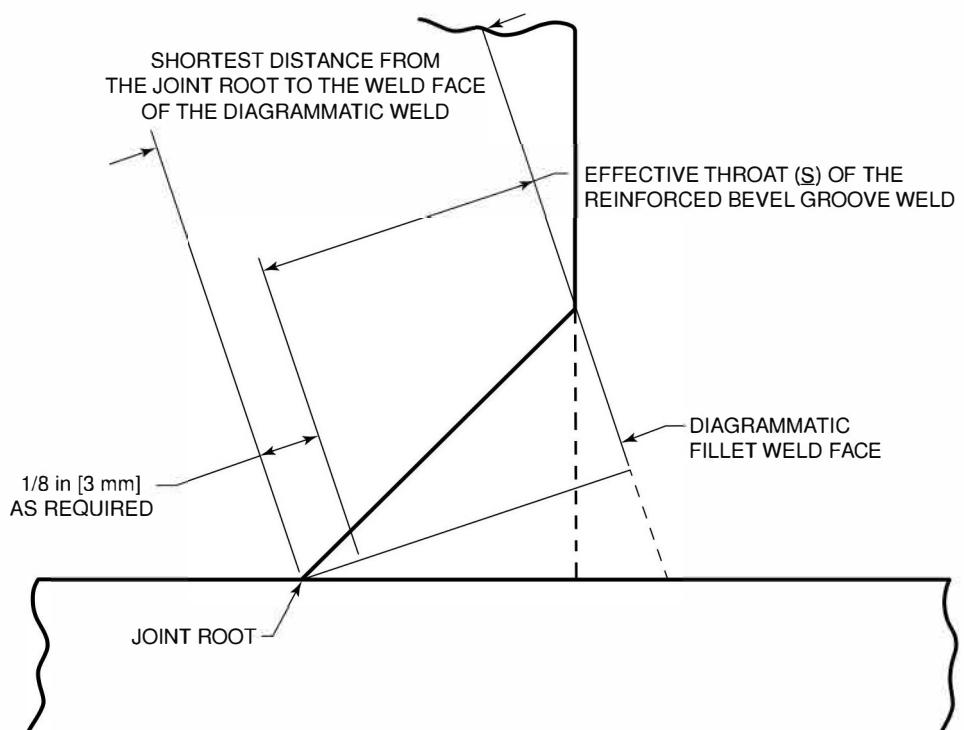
Bevel Groove Weld with Reinforcing Fillet Weld (see 4.4.2.7)
